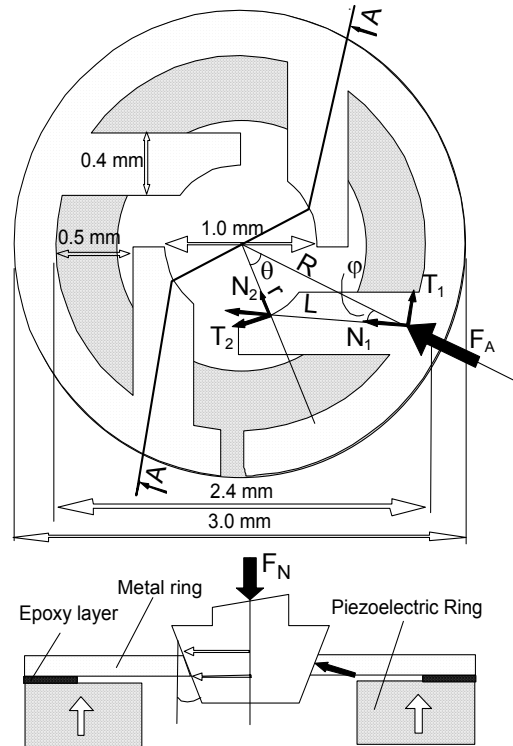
"Windmill" motor with a disk-shaped torsional coupler.
